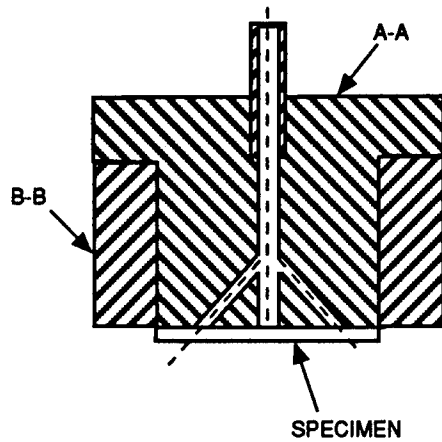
Brass specimen retainer and guide used to hold acrylic disks during hand grinding.
